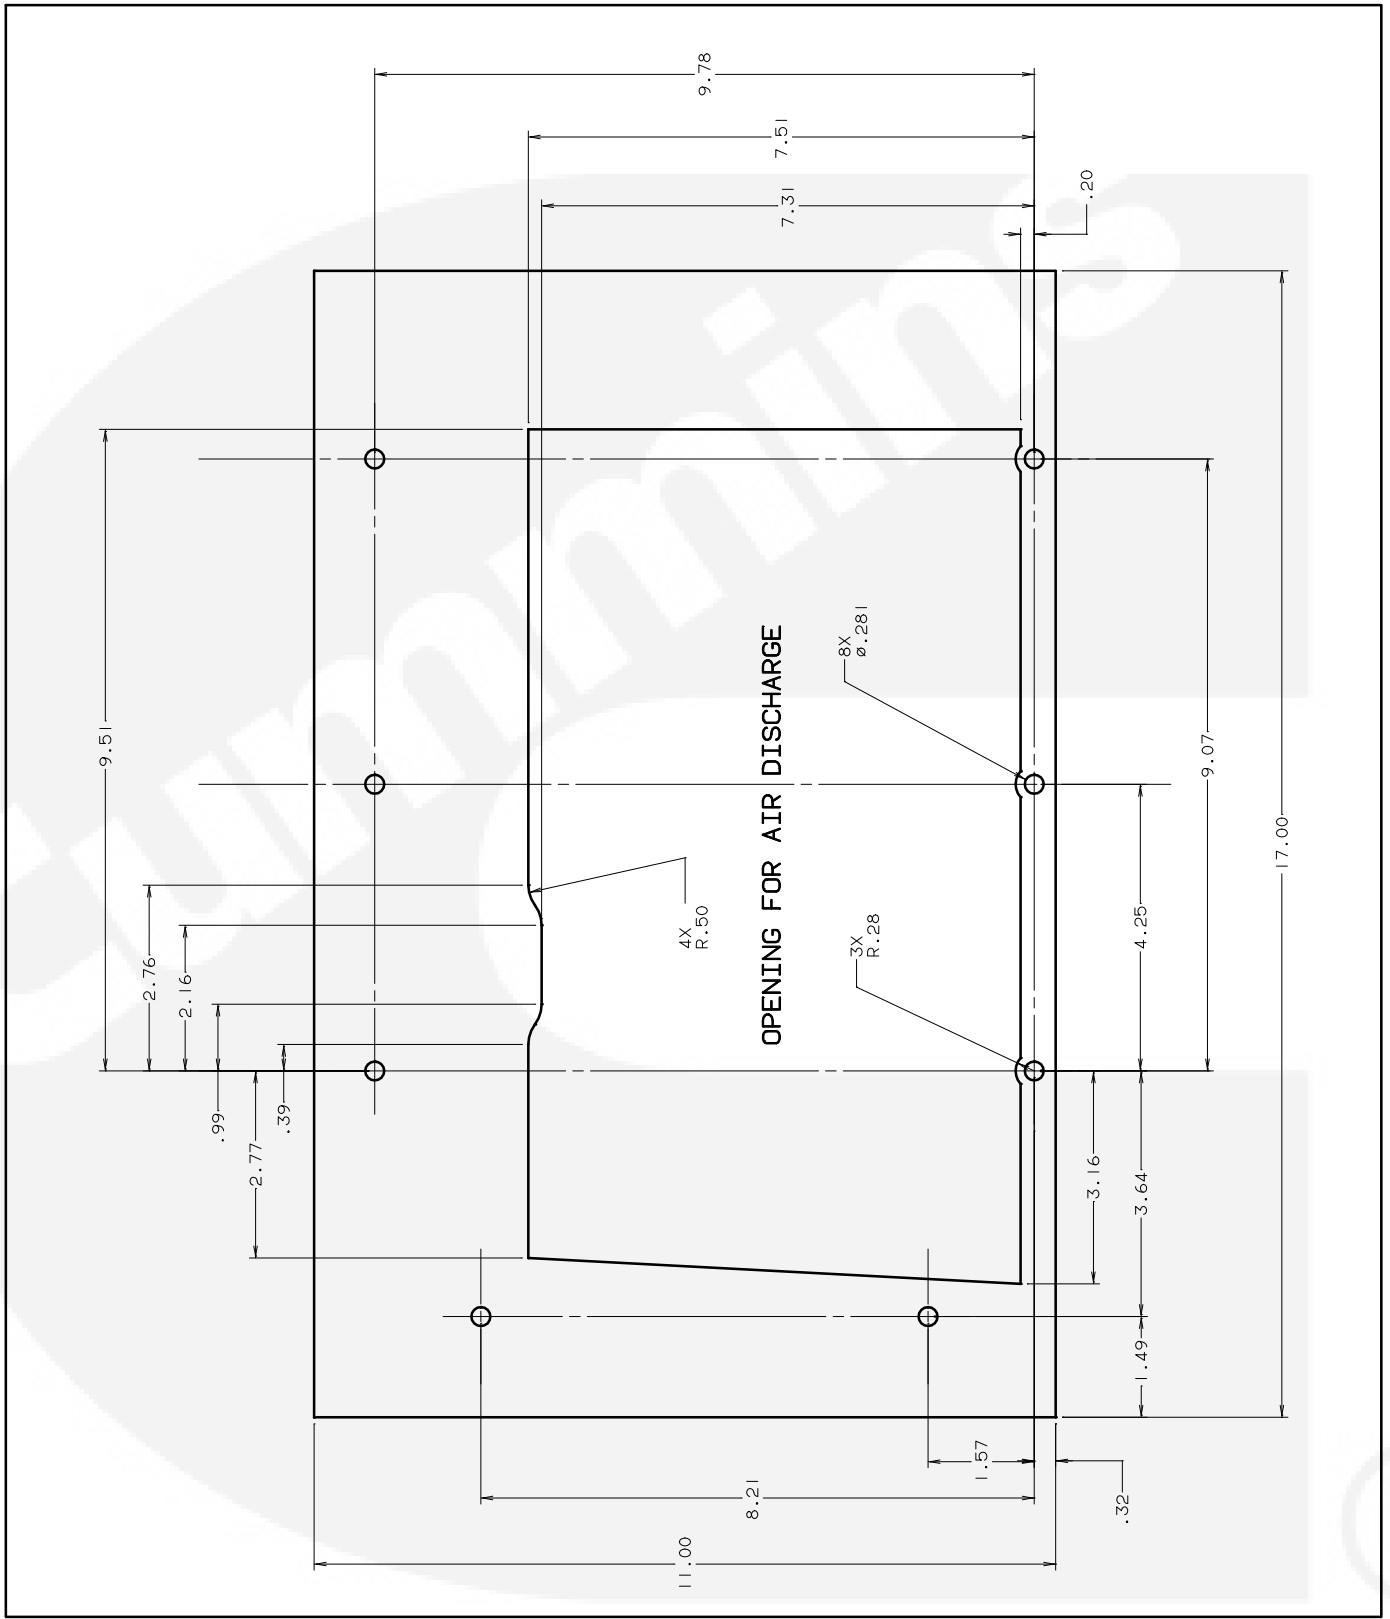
EXHAUST AIR OUTLINE DRAWING
